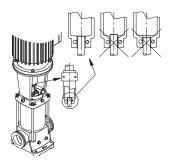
Coupling adjustment clearance CR(N) 32, 45, 64, 90, 120, and 150
